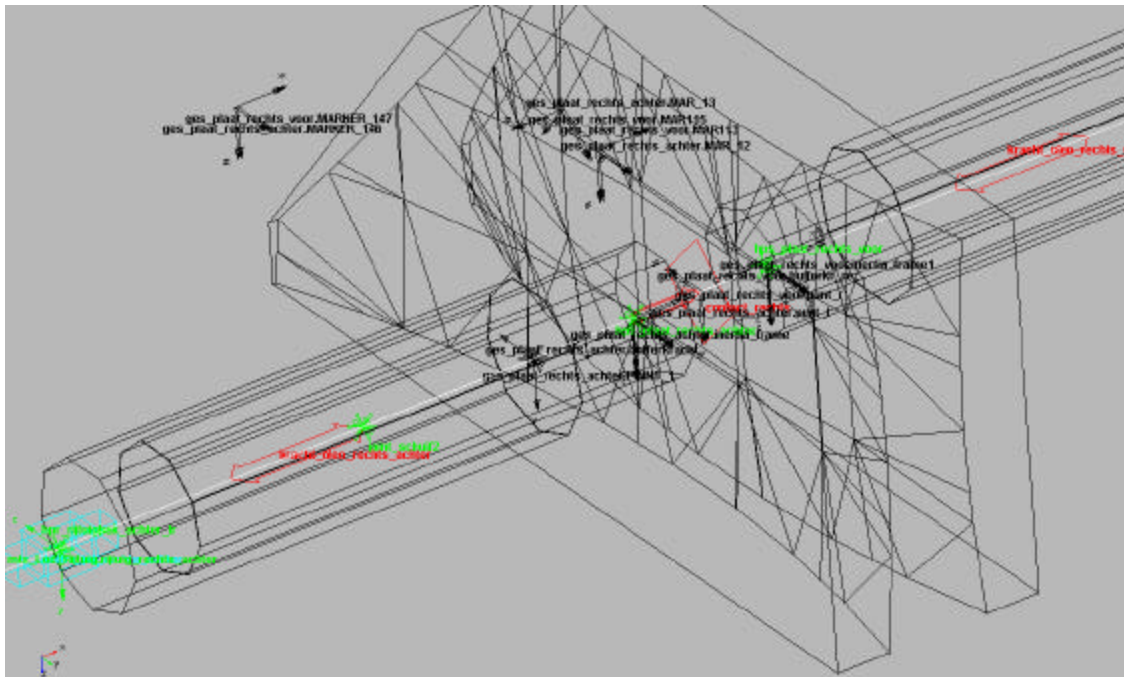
Layout of the Adams model of the Buffer and Draw Gear
